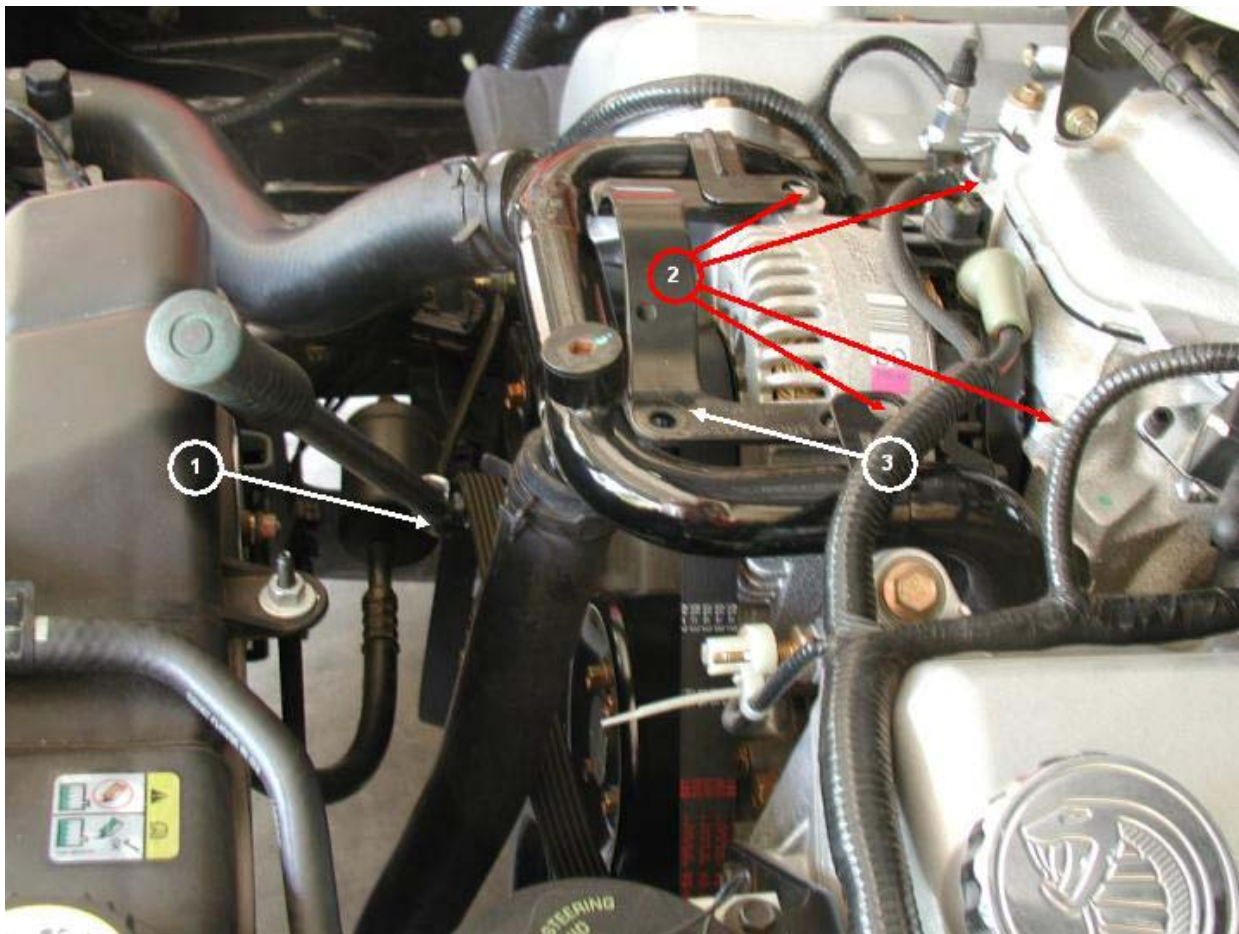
Accessory Belt Detensioning & Upper Alternator Bracket Repositioning
